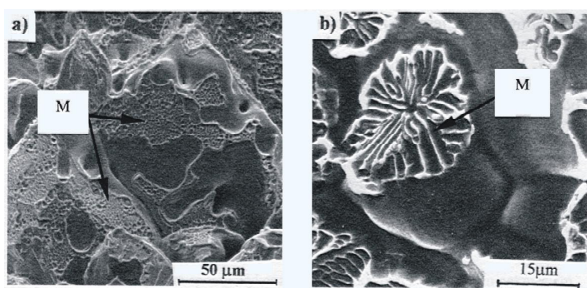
Fracture surface of an weld of steel, showing the ruptured solid bridges M [3]
